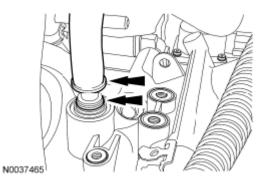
Locating Brake Booster Vacuum Supply Tube And Locking Ring Courtesy of FORD MOTOR CO.
